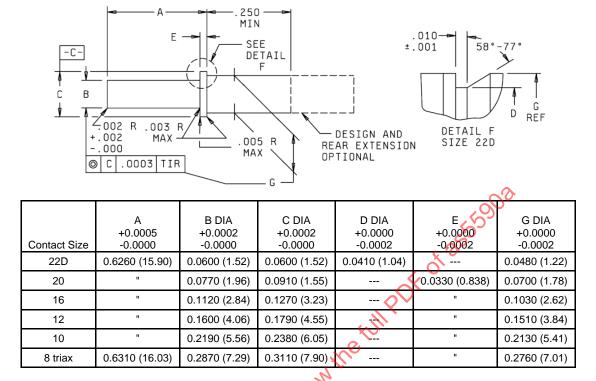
TEST GAUGE SOCKET, RETENTION
